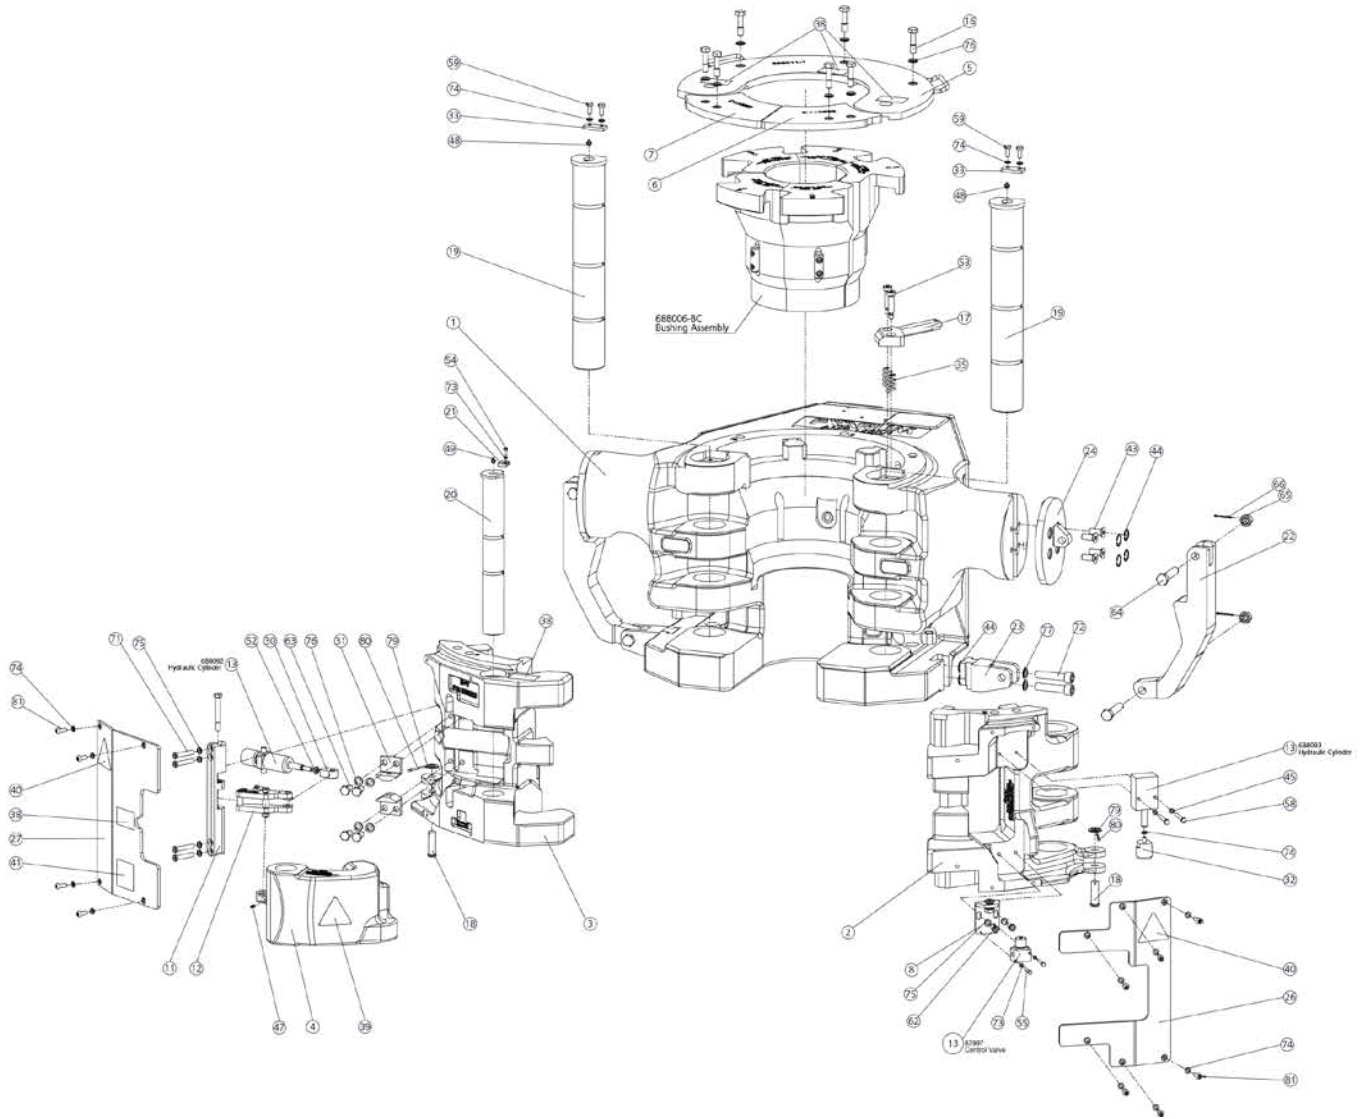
688000-Z AMP®-1250/1 Drawing I
